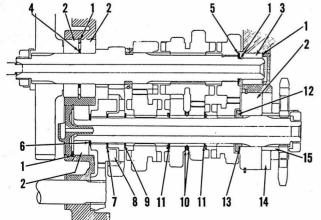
Cross sectional view of the transmission assembly showing location of spacers and washers.
